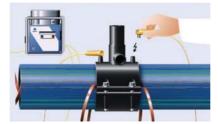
Welding in accordance with DVS 2207, Part 1
